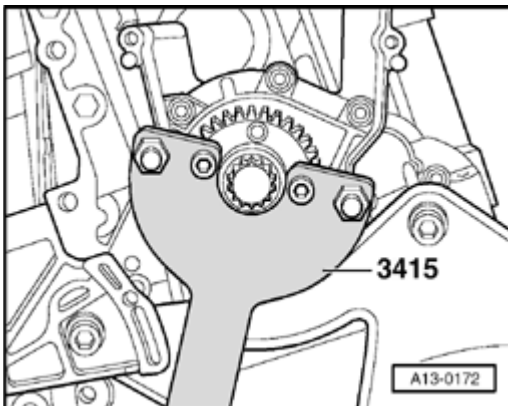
Removing Crankshaft Toothed Belt Sprocket
